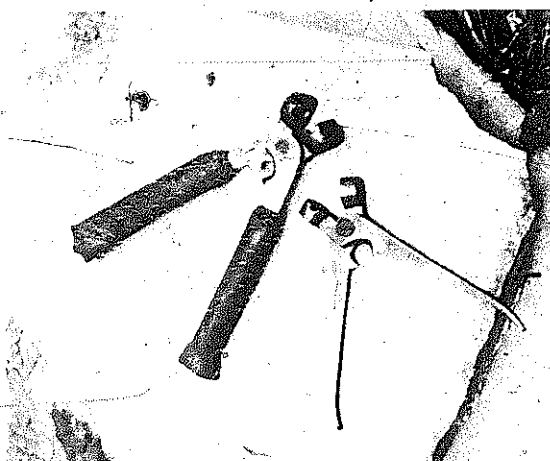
This photo shows Hershel's .445 mold and .315 mold. These molds are for .45-caliber and .32-caliber rifles.
